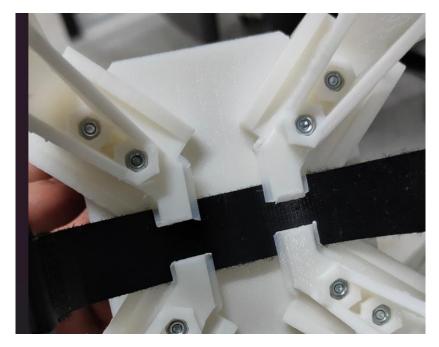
Assembly after Attaching Baseplate- Arms- Landing Gears together using 3M Screw
